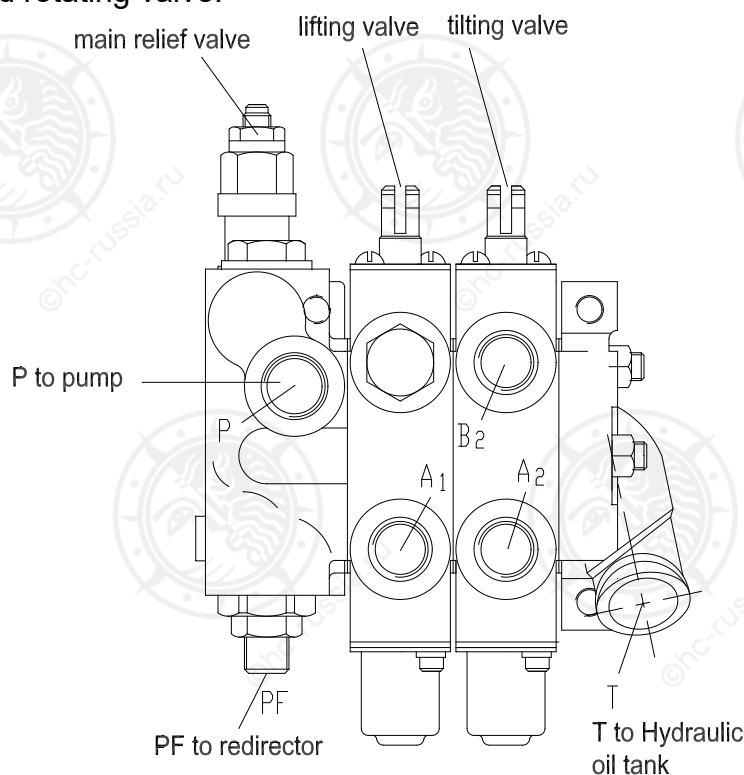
Control valve for 1t~3.5t forklift truck(for cycloidal rotor full hydrostatic power steering gear)
